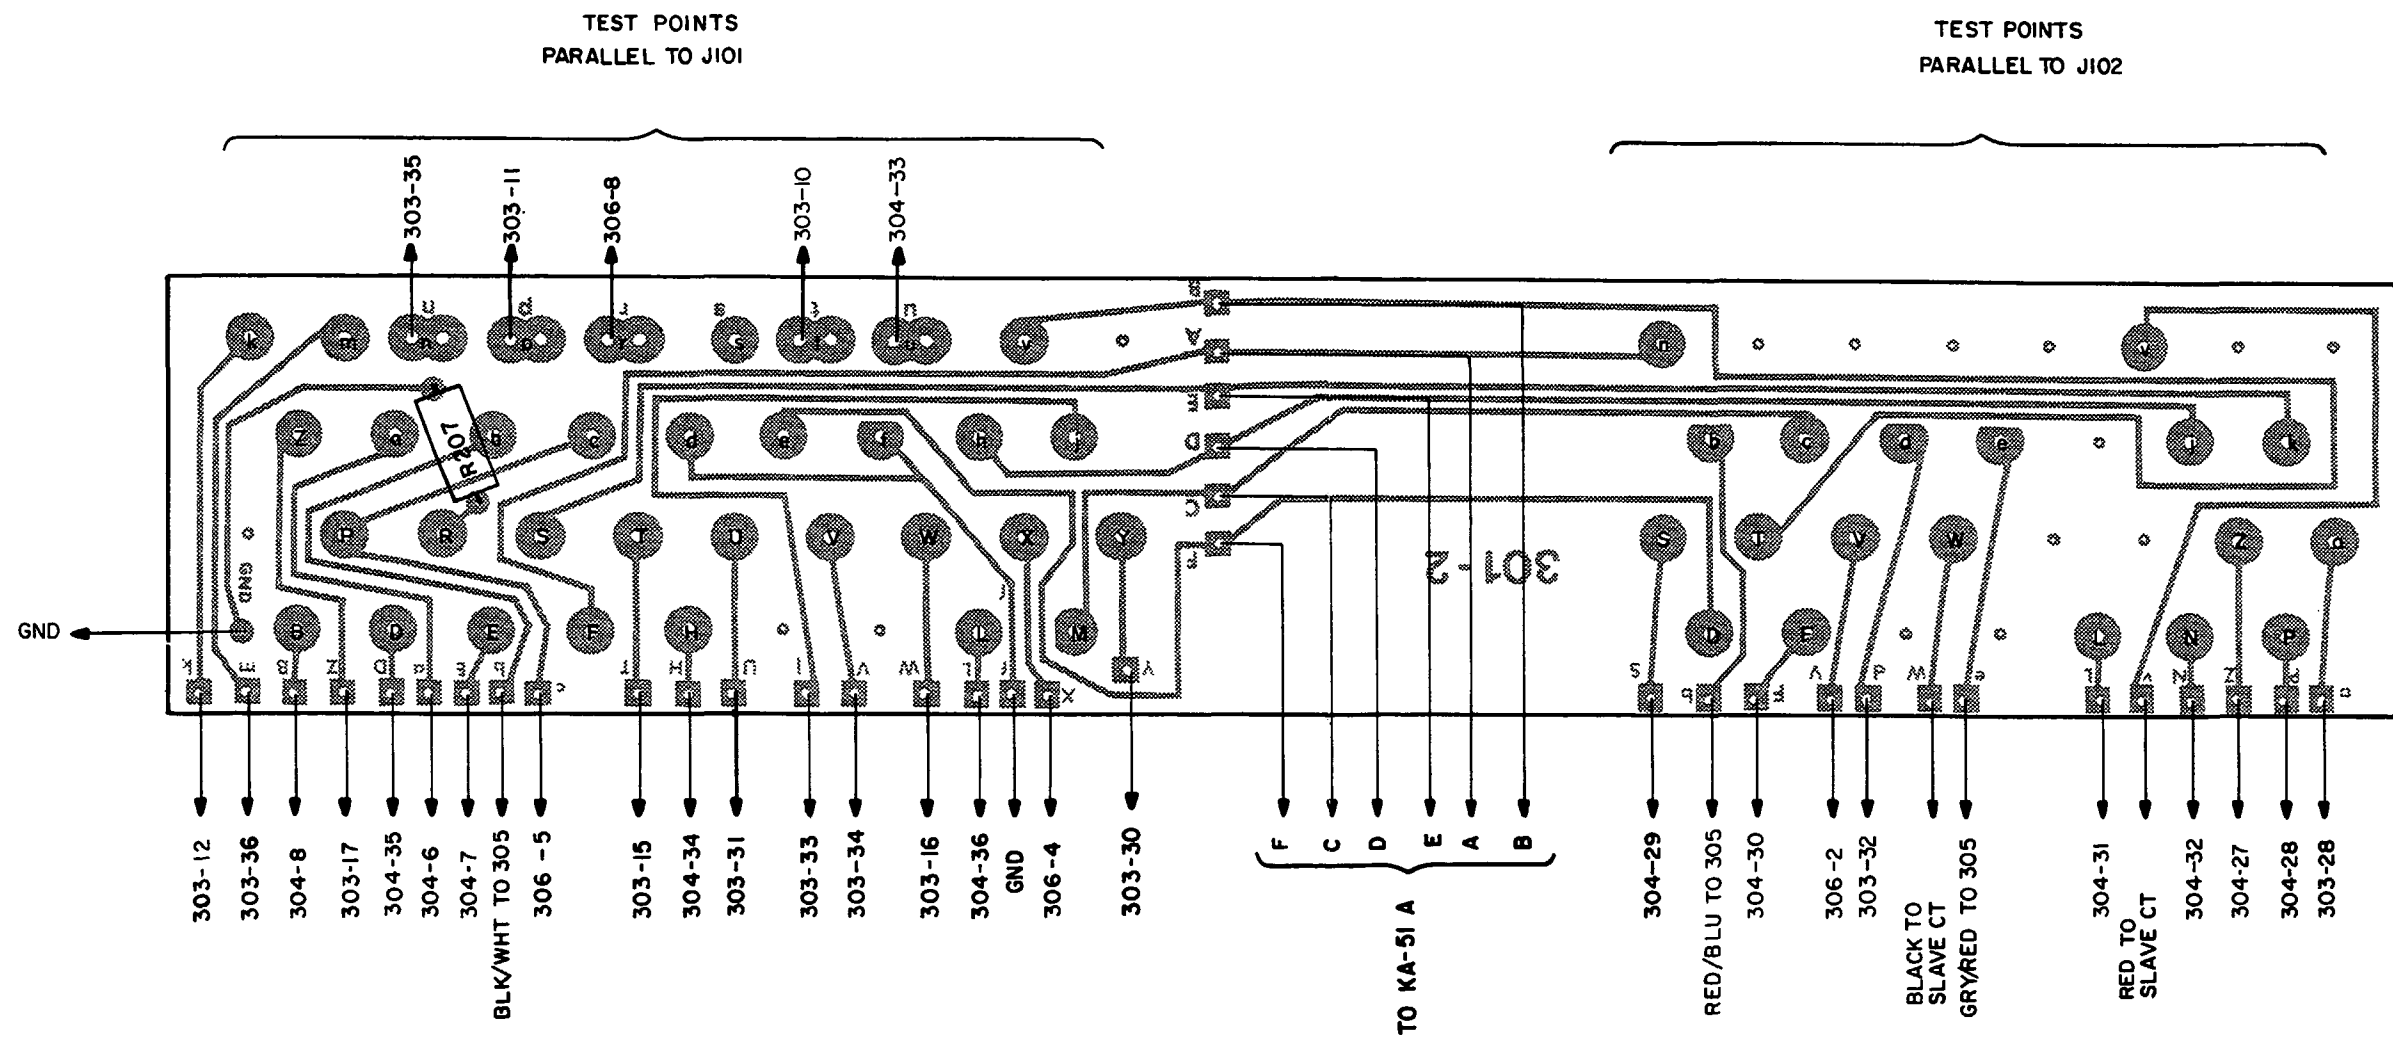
P.C. BOARD ASSEMBLY, BOARD 301-2, DRAWING
